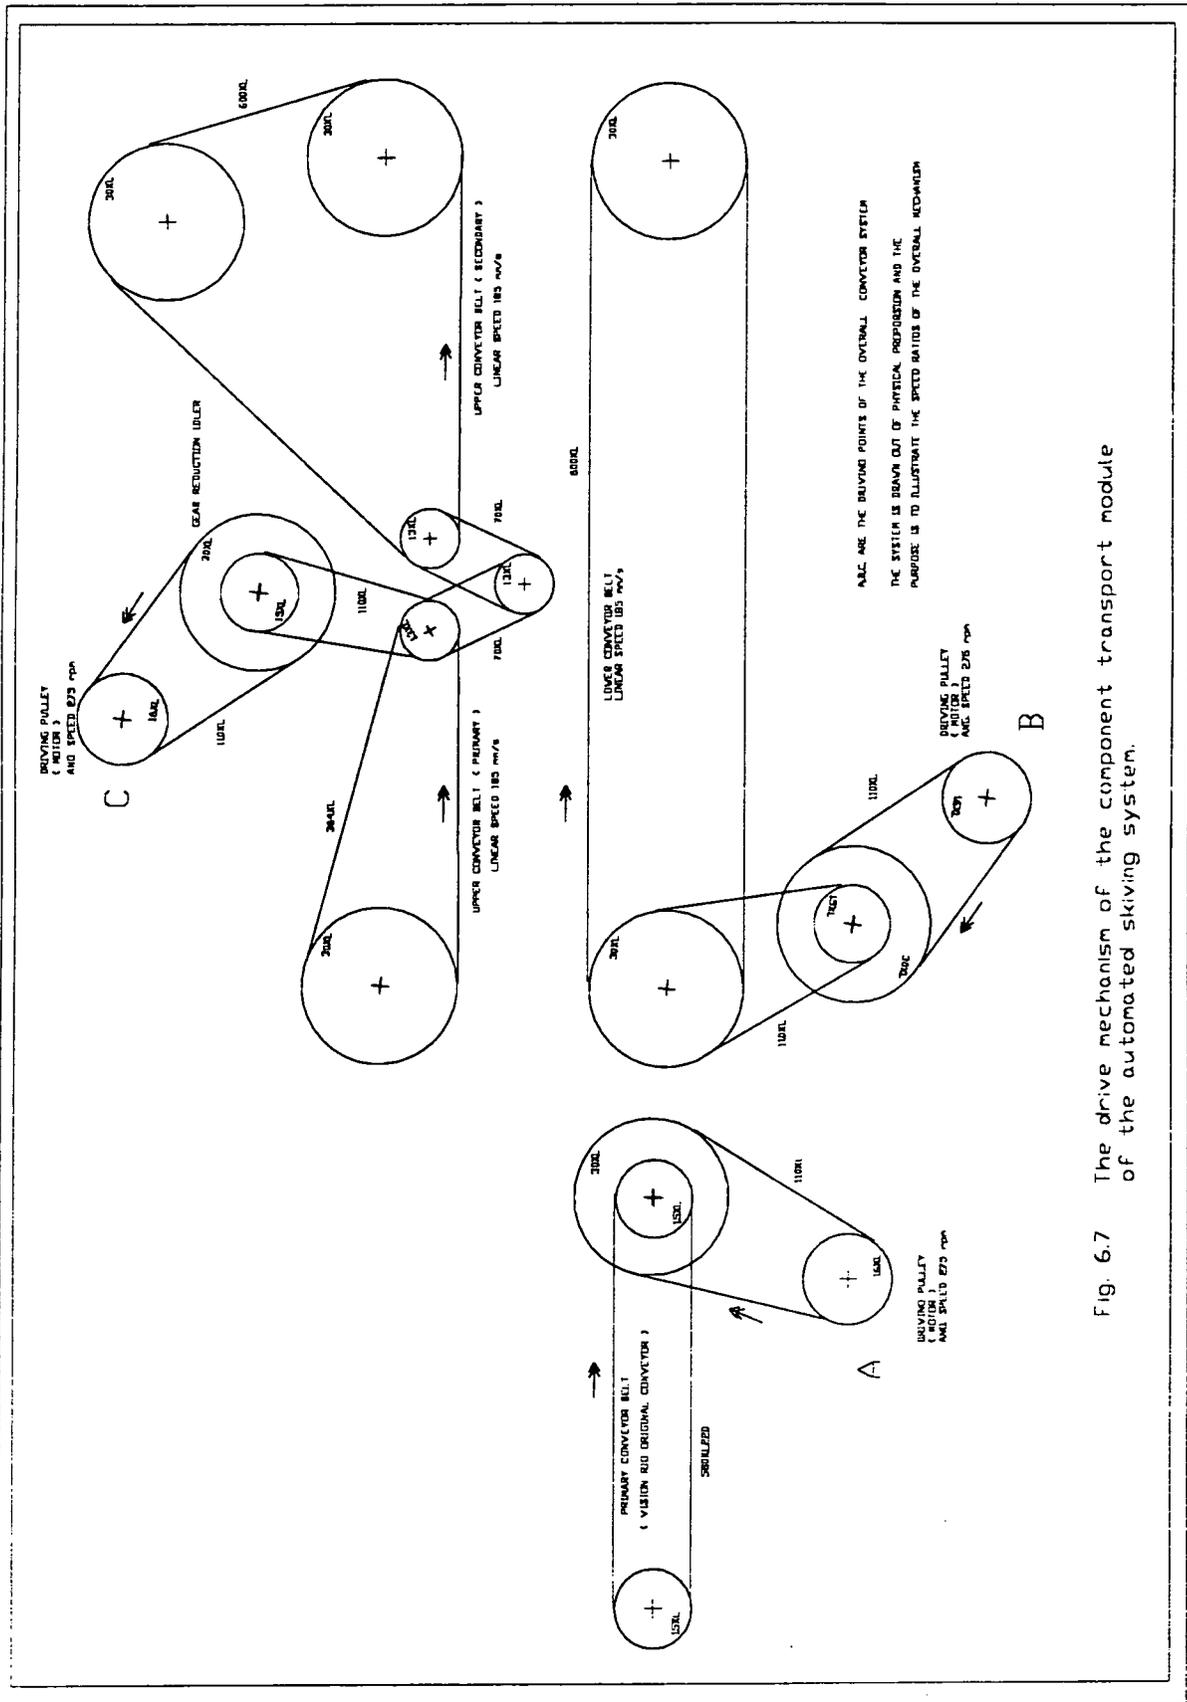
The drive mechanism of the component transport module of the automated skiving system.
